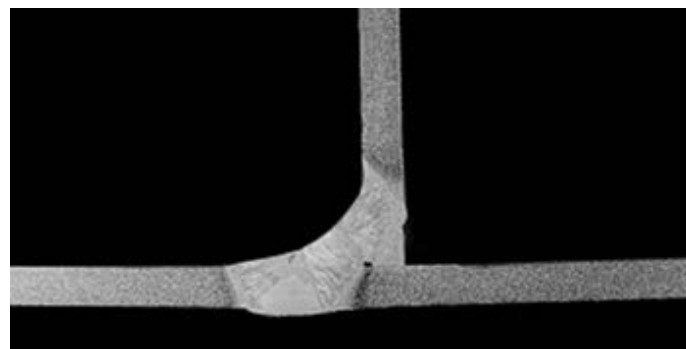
Macrostructure of the T-joint with imperfections, i.e. incomplete root penetration, fillet weld root concavity with the vertical element undercut and the excessive melt-through of the horizontal element
